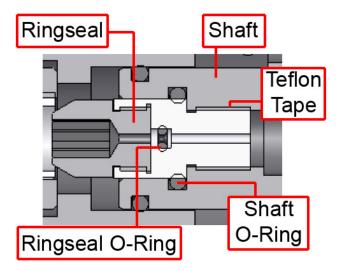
Cross-section View of Ringseal Showing O-Rings
